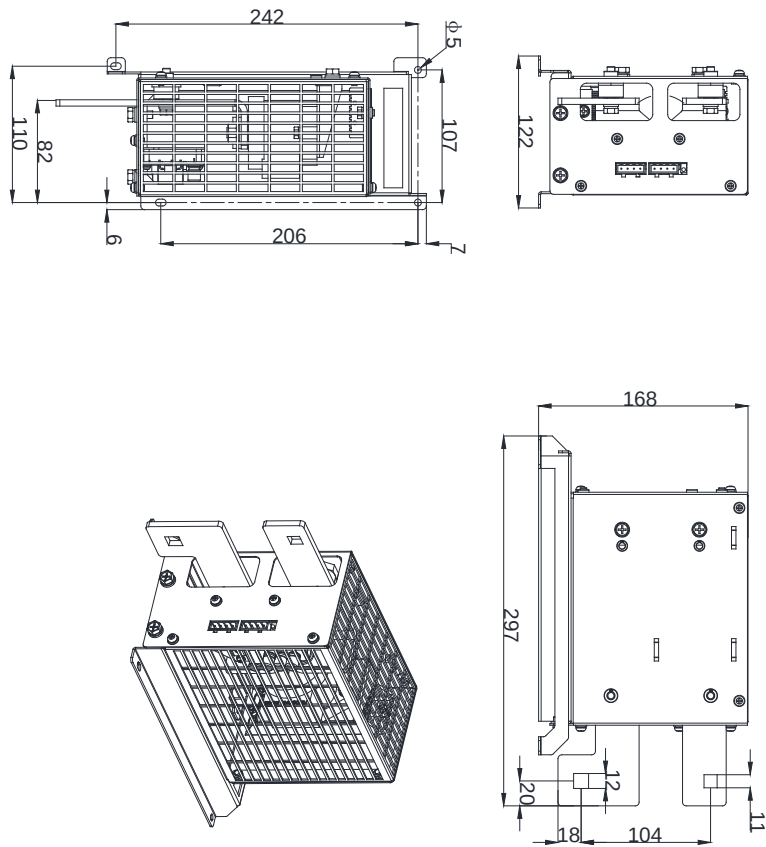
Dimensions of HST-7004 DC Bus Buffer Module
